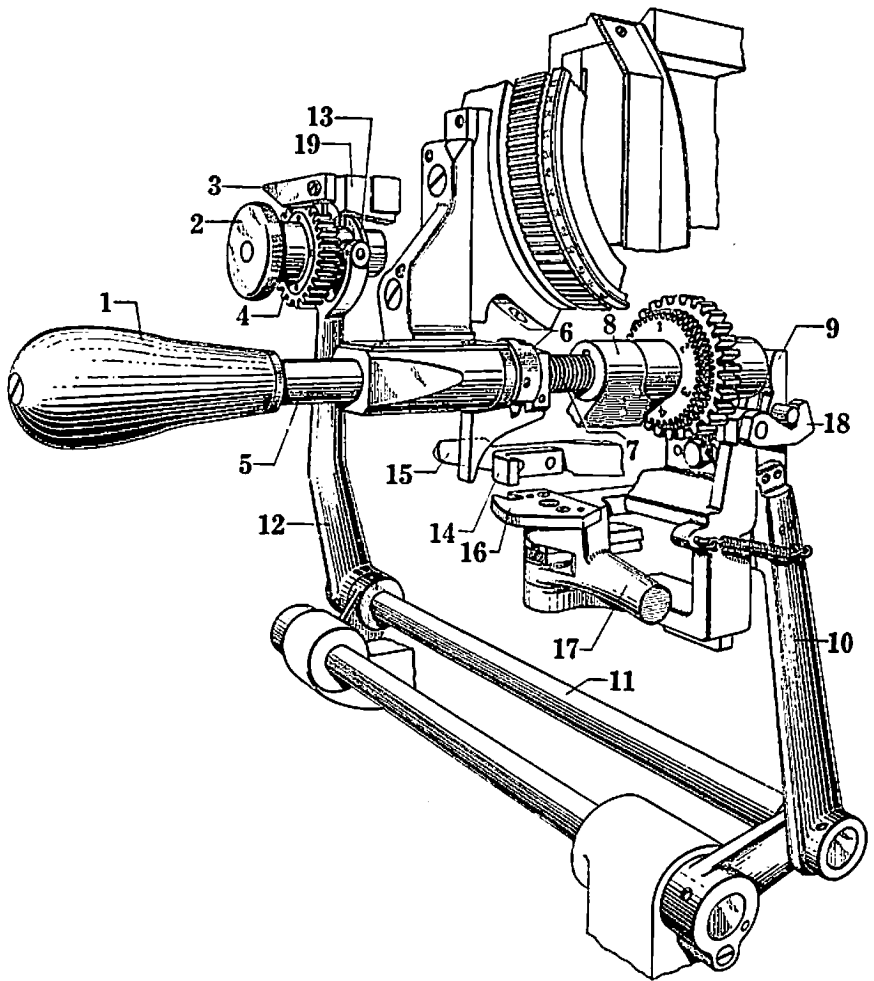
Perspective View of the Mold Disk Pinion Operating Mechanism and the Mold Turning Mechanism.
